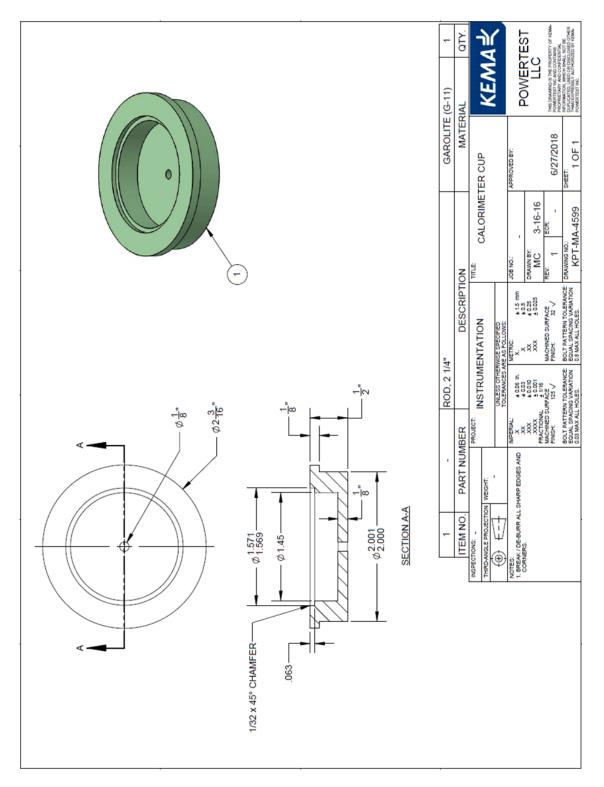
Drawing KPT-MA-4599, ASTM Calorimeter Cup.
